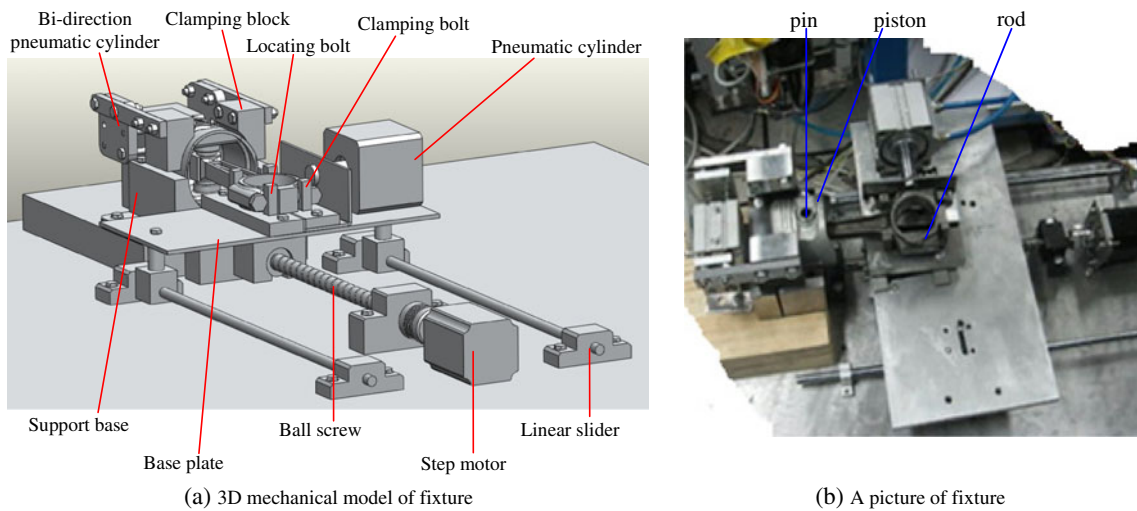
The fixture is designed to hold the rod and piston (a) 3D mechanical model of fixture (b) A picture of fixture
